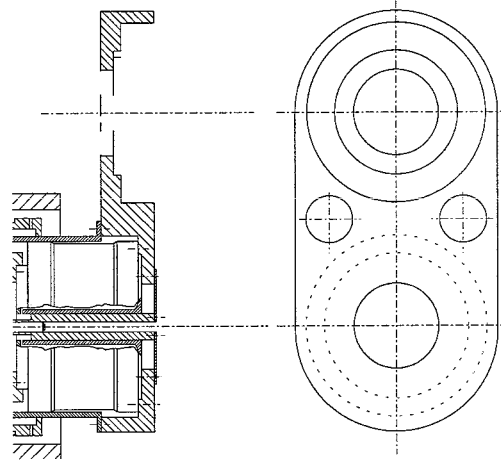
Step 11: Mounting arm 2 (16.) and securing the Rotor extension DM30 (14.).
